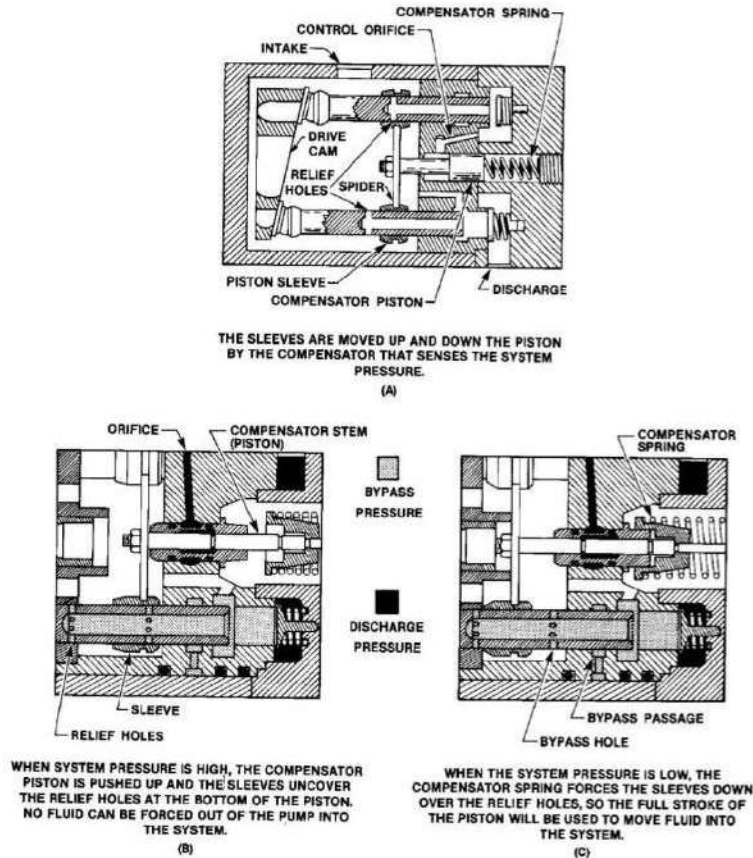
Strat power pump, flow and pressure controlling mechanism.
